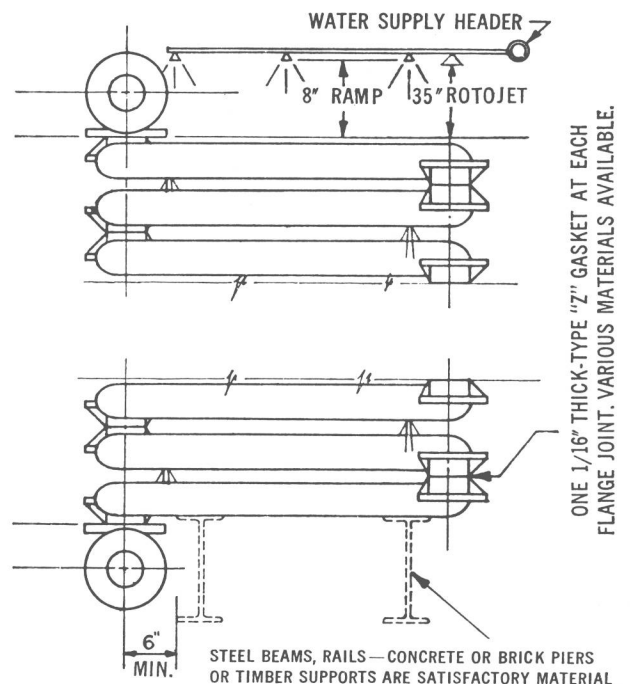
B. Elevation assembly. (By permission, Crane Co., Process Equipment Div.)
